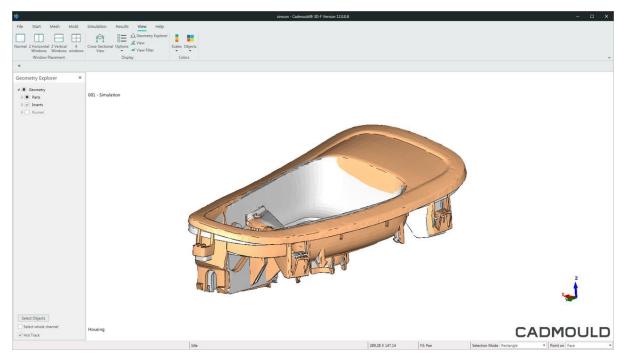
CADMOULD Unwarp displays the necessary mold compensation for shrinkage and warpage. The original part geometry is shown in grey. Orange areas signify compensated parts of the mold. The compensated mold can be exported in suitable CAD-compatible formats (tessellated, suitable for reverse engineering, see details below).
